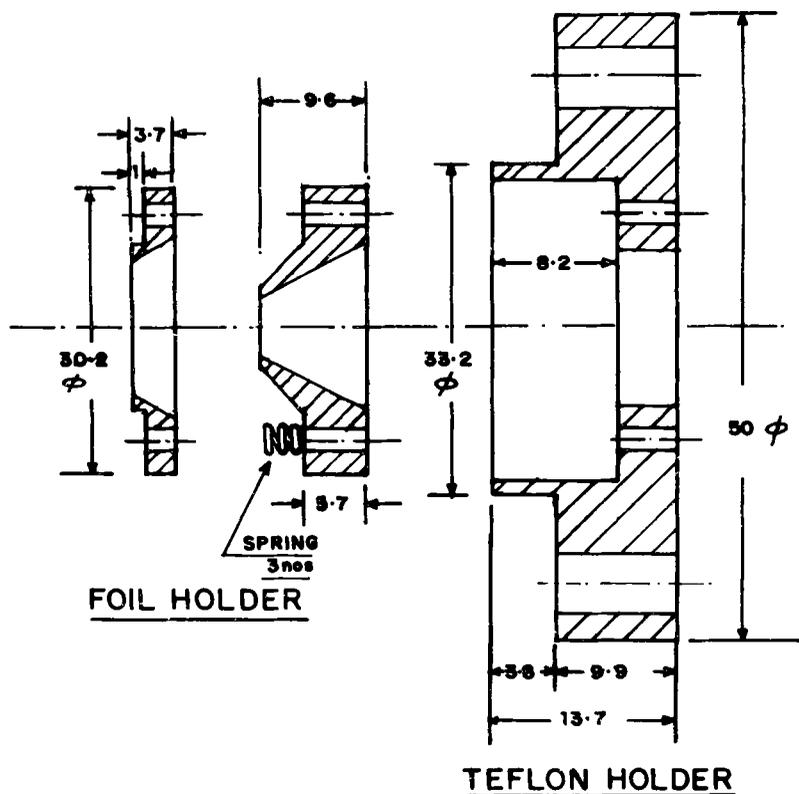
The target holder used for stretching thin (1 to 2 mg/cm² thickness) tantalum foils. The dimensions indicated are in mm.
